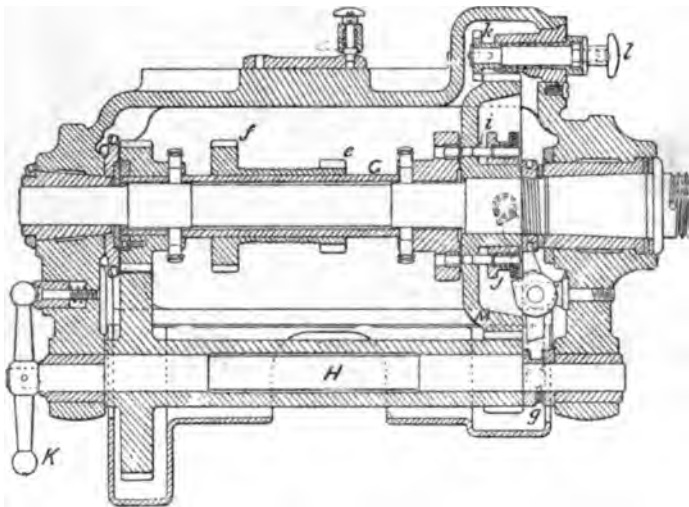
Horizontal Section through Back Gears, B. & S. Machine.
